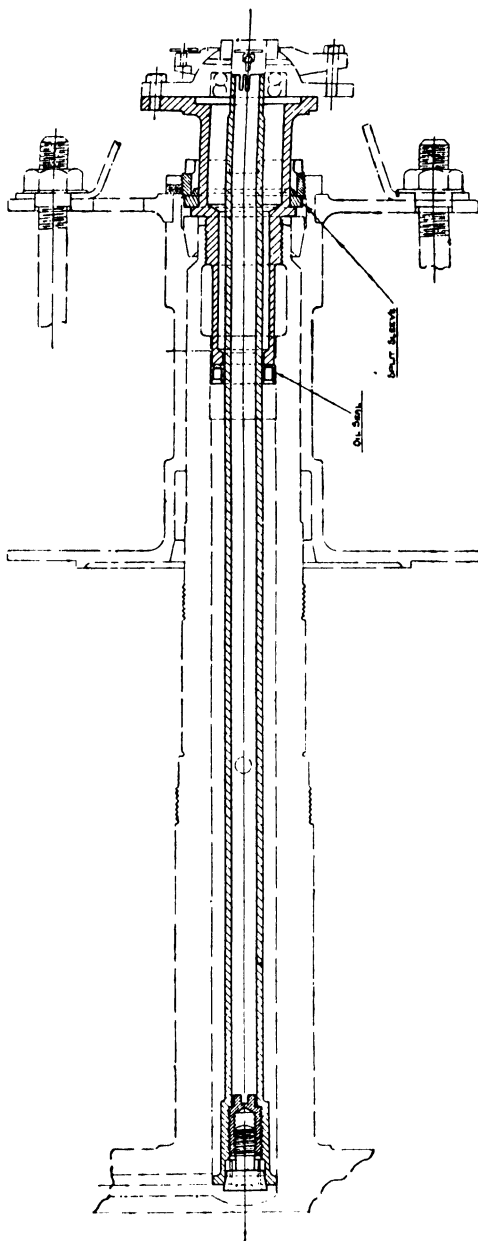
The torsiongraph fitted to an engine crankshaft.
